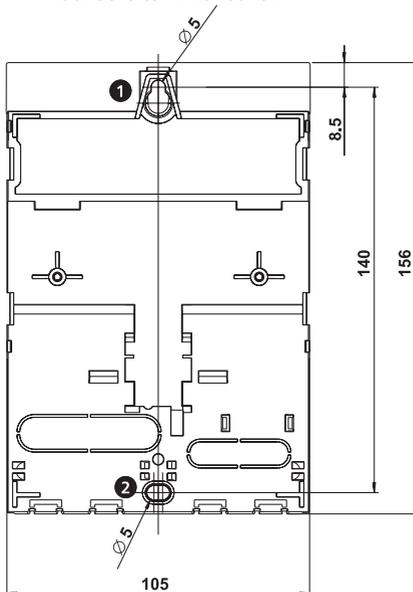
Rear side of the controller with the upper ❶ and lower mounting holes ❷
